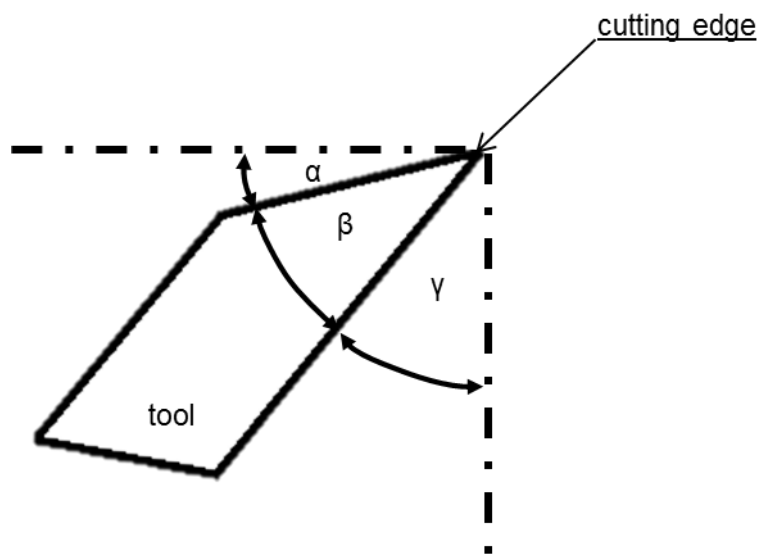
cutting tool, with the cutting edge, rake angle (γ), wedge angle (β) and clearance angle (α).
